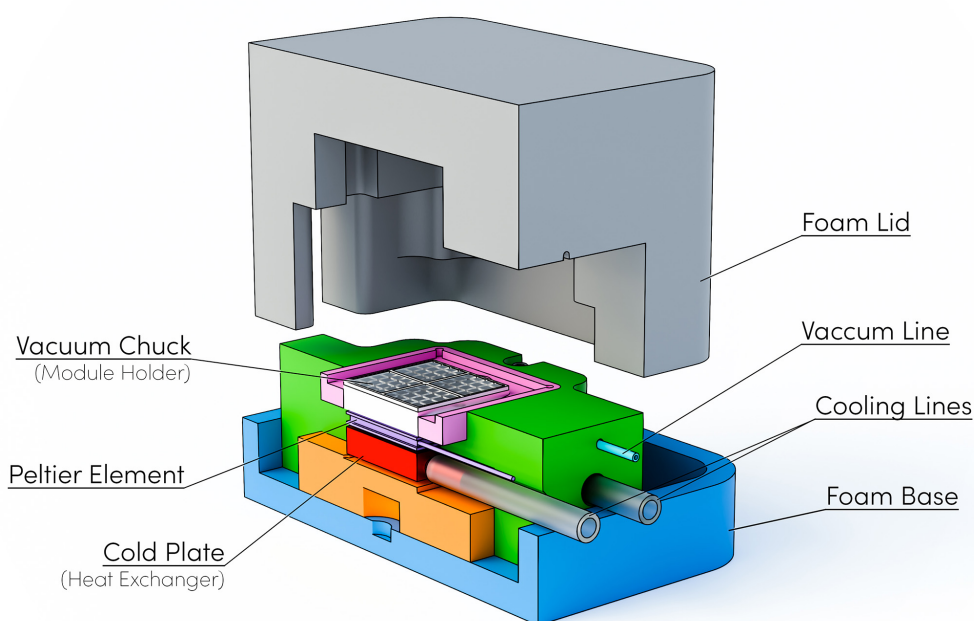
Cross-sectional view of an ITk cooling chuck unit. In the centre, the cold plate, the Peltier element and the vacuum chuck are visible.
